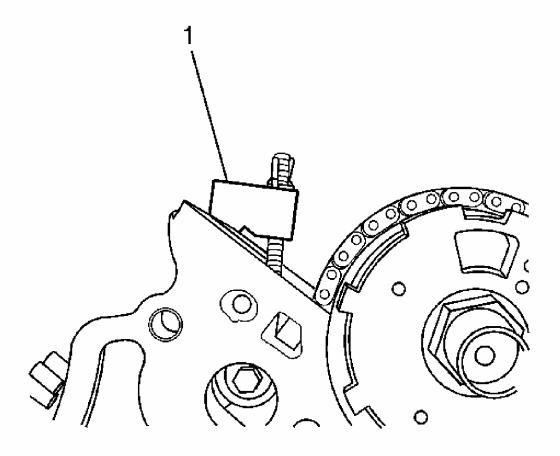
Positioning Top Retention Tool On Cylinder Head Courtesy of GENERAL MOTORS CORP.
